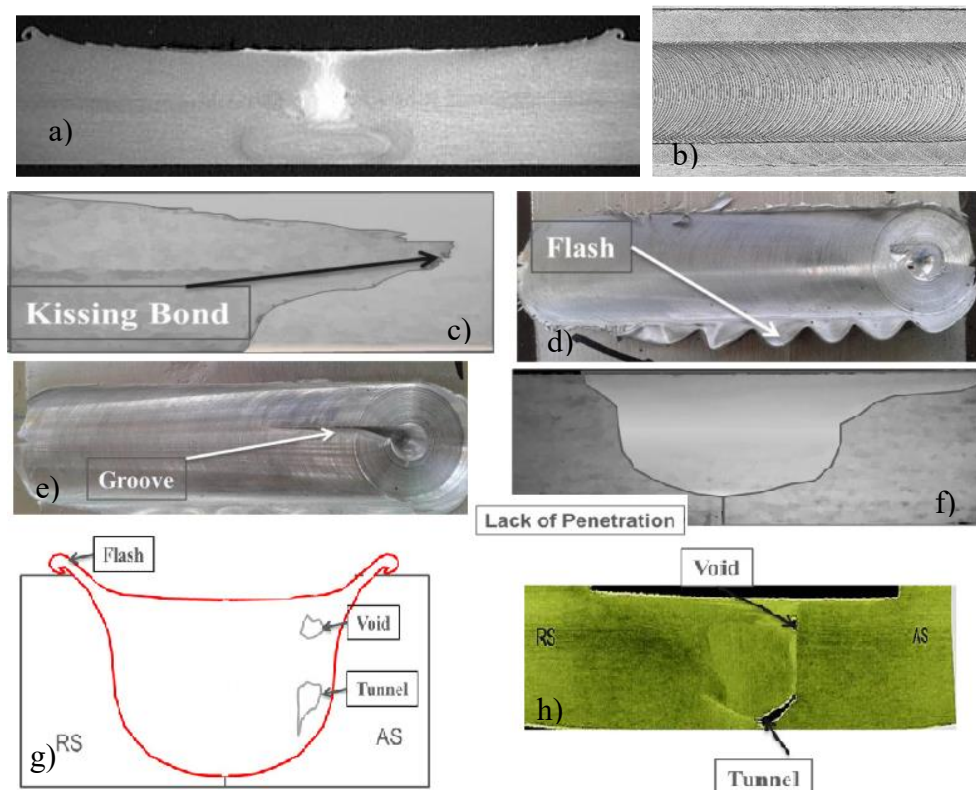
The cross-section and surface of the weld produced by FSW (a and b), and some typical defects FSW (c to h). (Adapted from El-Sayed et al., 2021; and Thomas et al., 2003).
